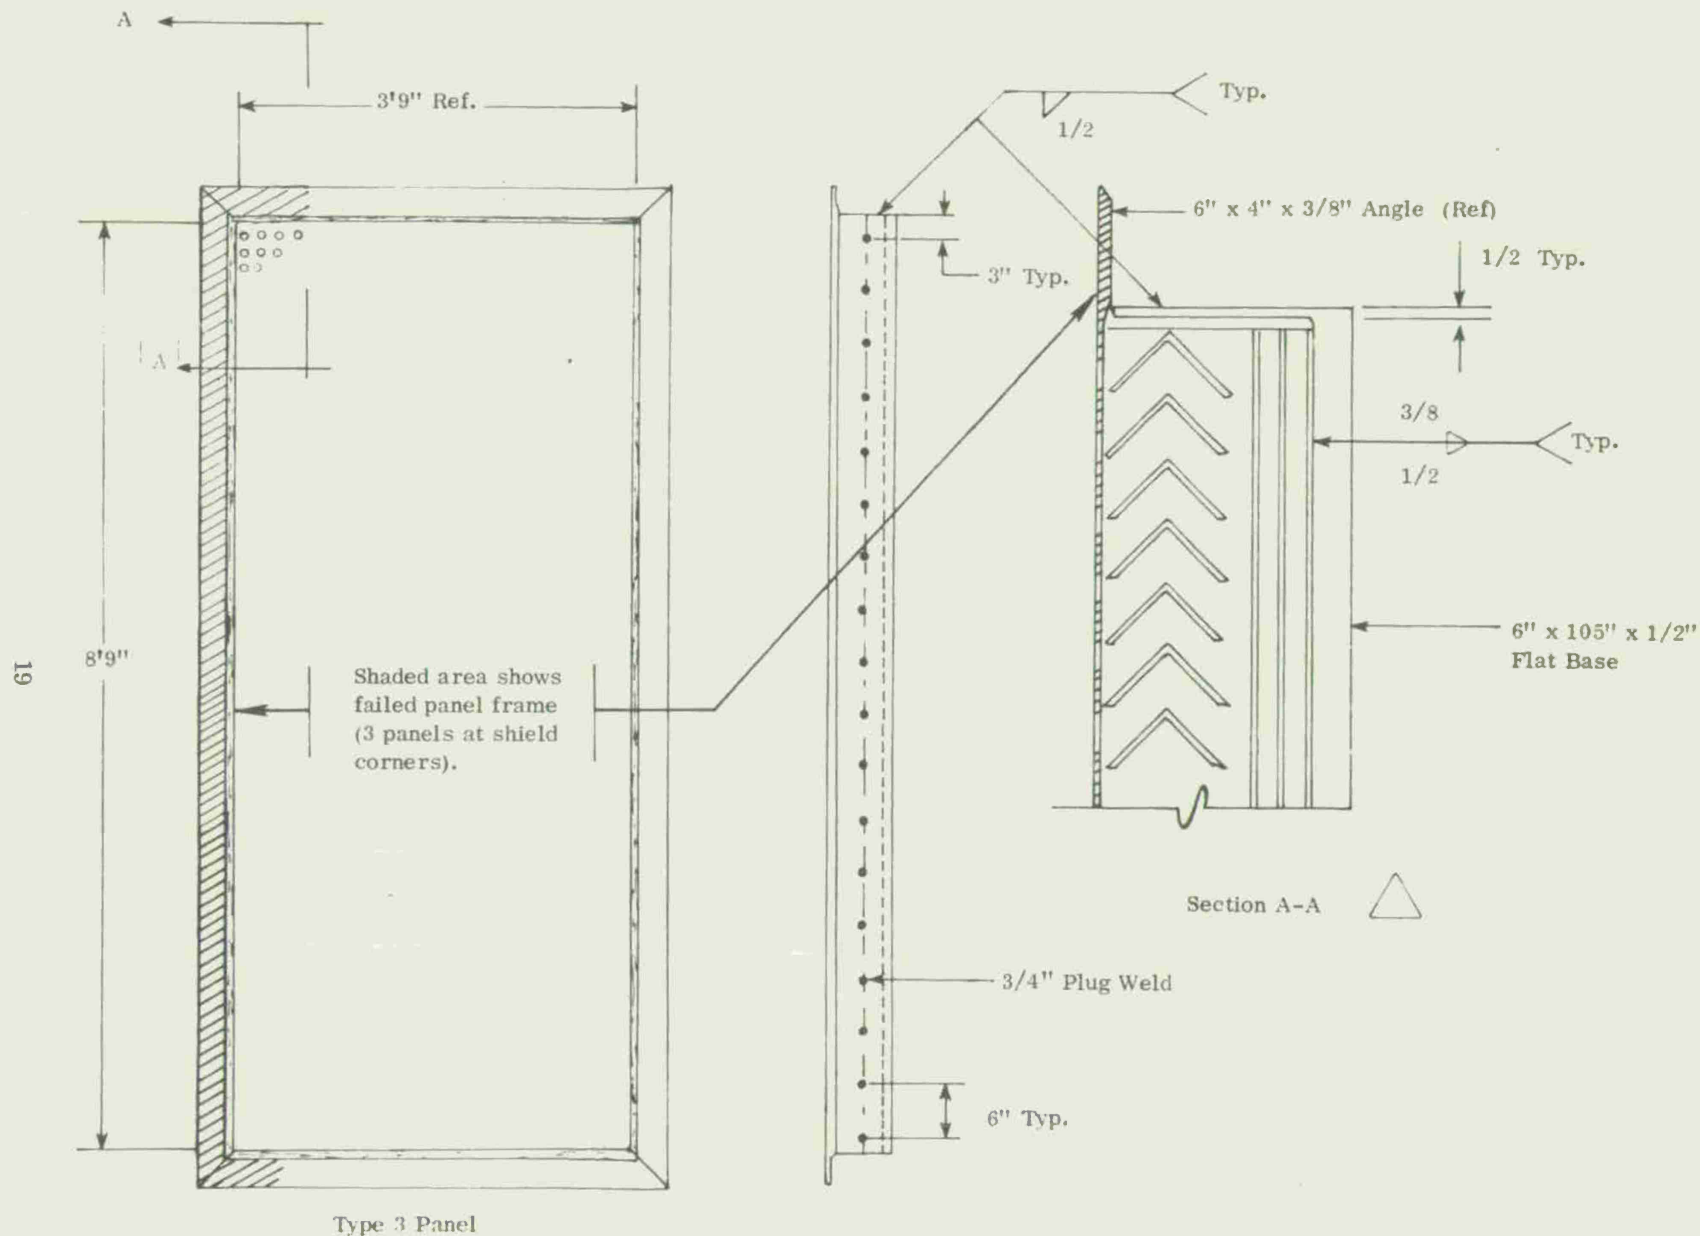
Category 3 Test B3-1 Proof Pressure Test - Diagram of Panel Frame Failure
